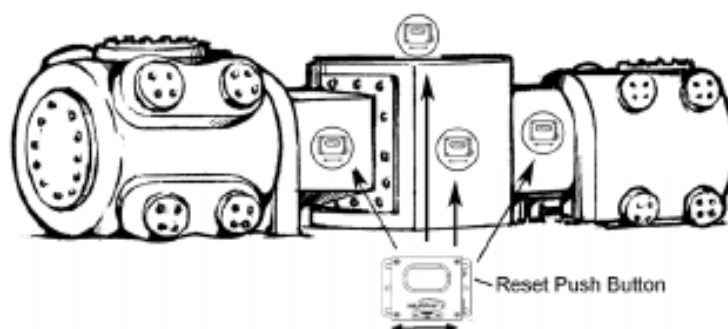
Typical Bearing Housing or Pipe Mounting
